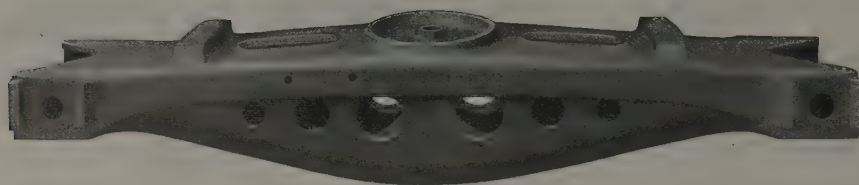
Gould Improved Z-Type Cast Steel Truck Bolster for Freight Cars. Gould Coupler Company.
